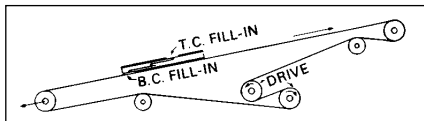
Fig. D - Dual or tandem drive with primary pulley contacting top side of belt.
